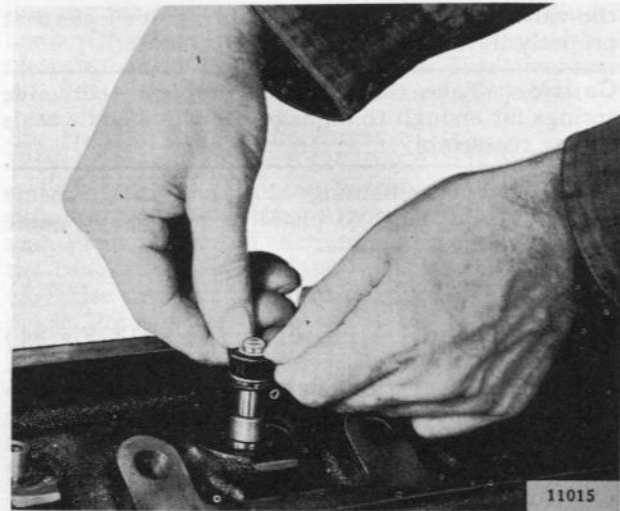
SLIDING SEAL DOWN TO VALVE GUIDE
